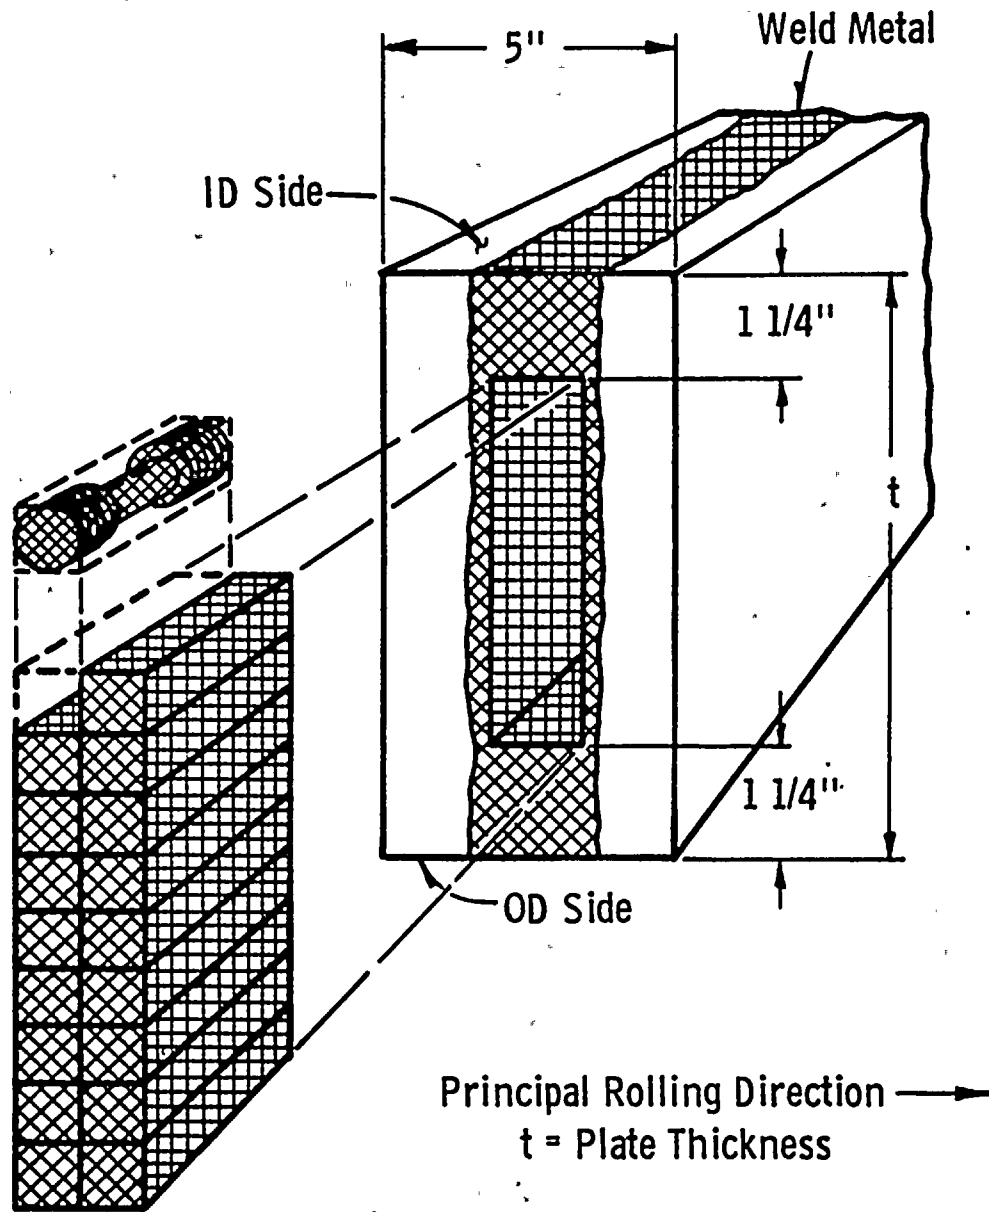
LOCATION OF TENSION SPECIMENS WITHIN WELD METAL TEST MATERIAL
